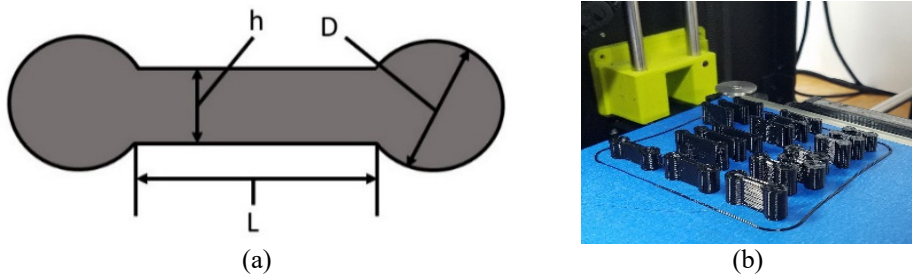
NinjaFlex® specimens. (a) Side view diagram; and (b) Printed specimens.
